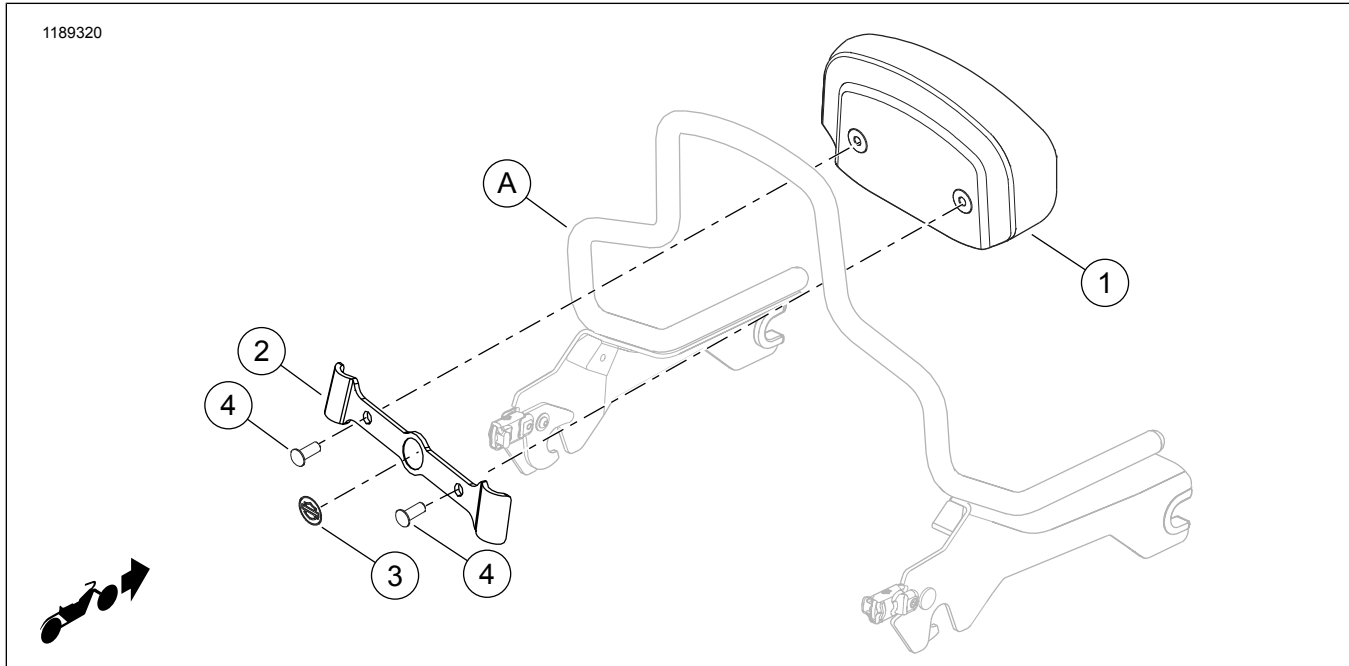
Service Parts: Softail Compact Backrest Pad Kits
